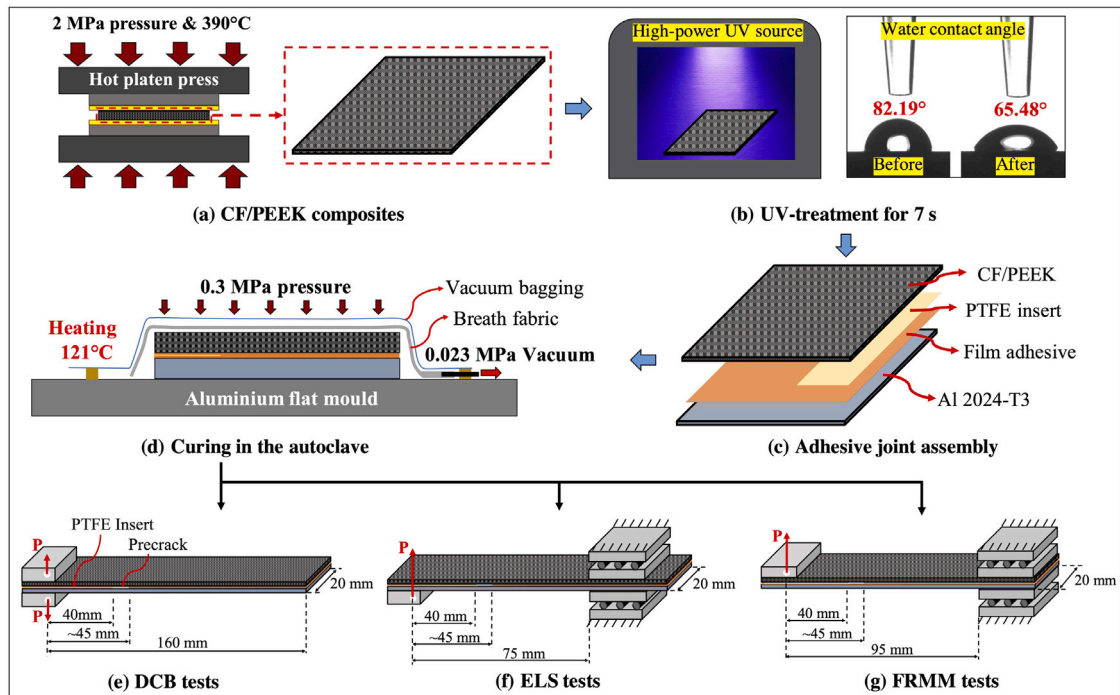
Illustrations for the sample preparation and fracture tests of the adhesive joints.
